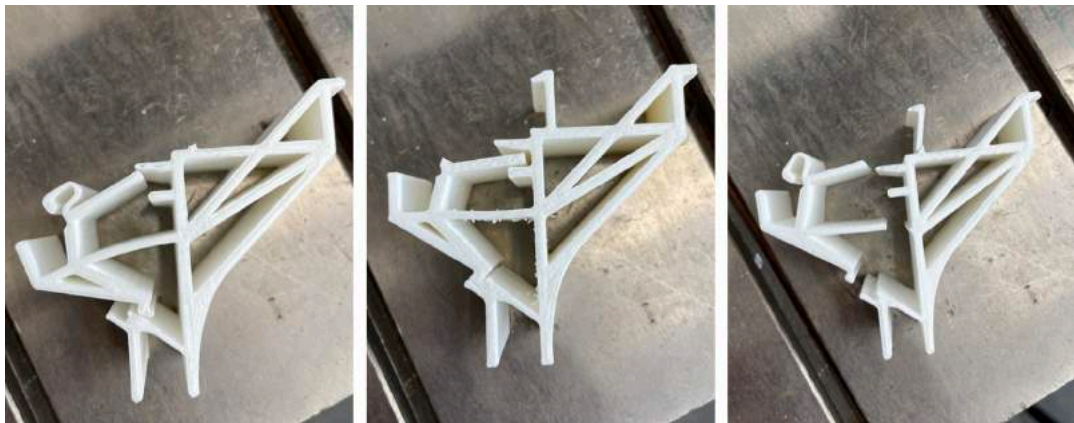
Specimen 13 - specimen 14 - specimen 15 (Own)
